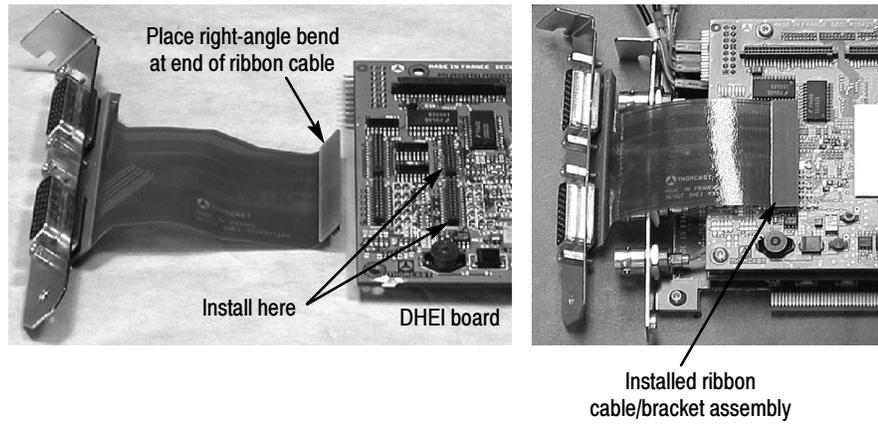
shows how to install the DHEI ribbon cable onto the DHEI board.
